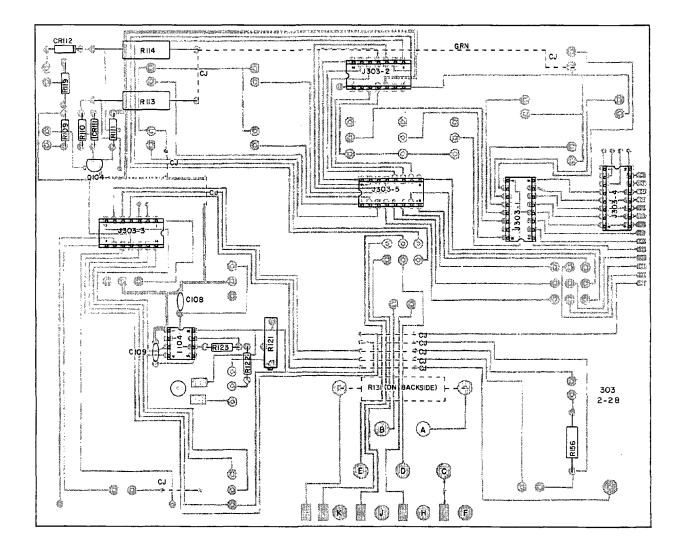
P.C. BOARD ASSEMBLY, BOARD 303, DRAWING
